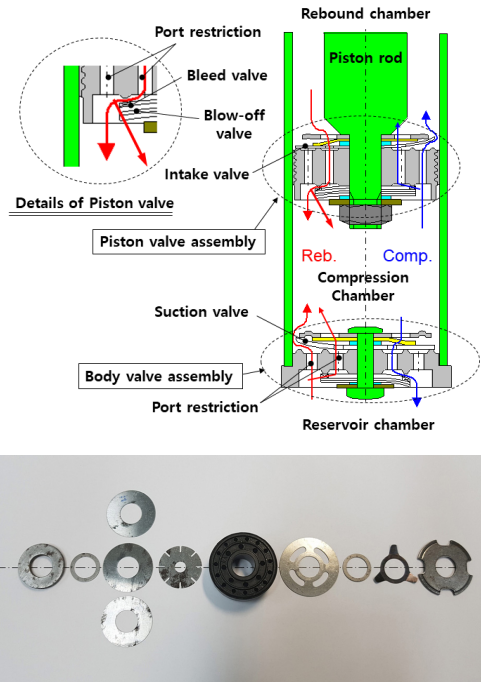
Detailed configuration and piston valve assembly of automotive shock absorber
